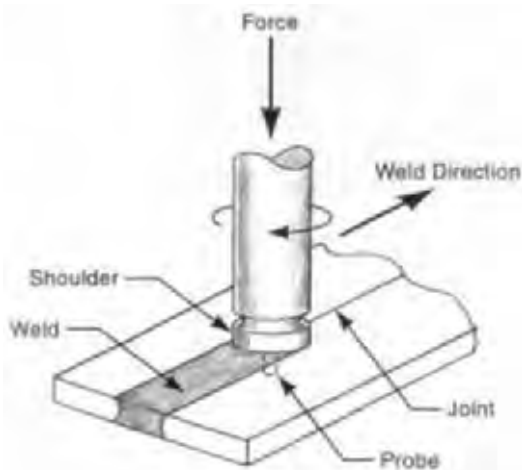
C13i Schematic representation of friction stir welding (FSW).
